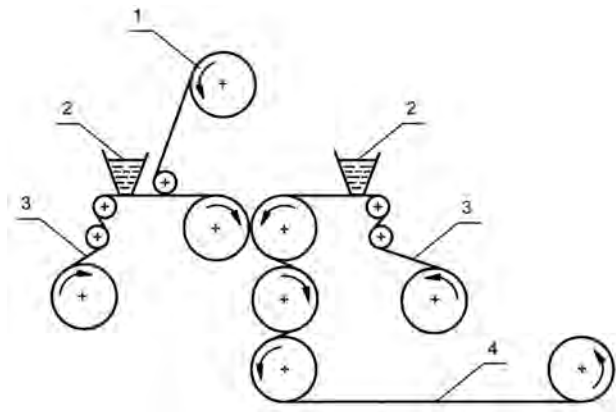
A scheme of a ¼-technical equipment constructed at Plastics Department, Technical University, Szczecin, to make SMC: 1 – unreeled glass roving mat; 2 – doctor blades with an impregnating paste; 3 – film bobbins; 4 – SMC package wound onto a take-up roll
